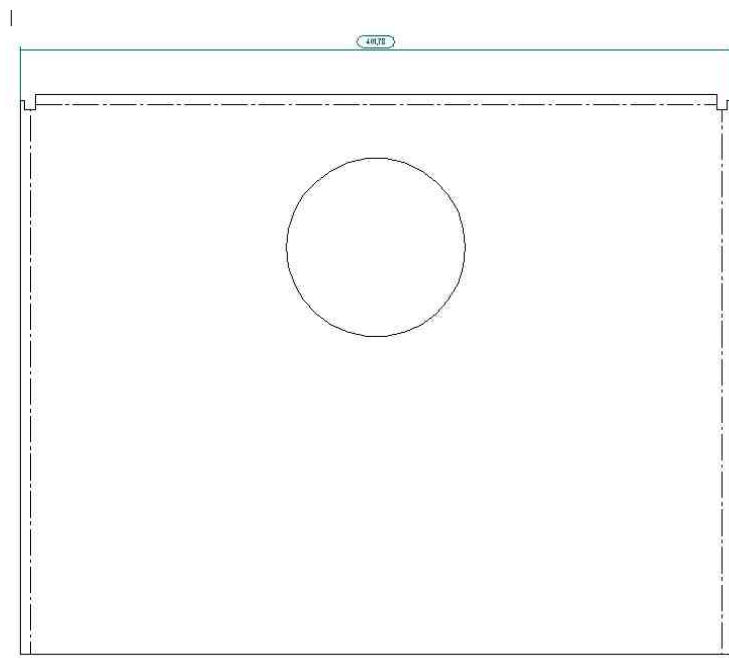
Detail folded open drawing extracted from Solid Edge: Side, right
